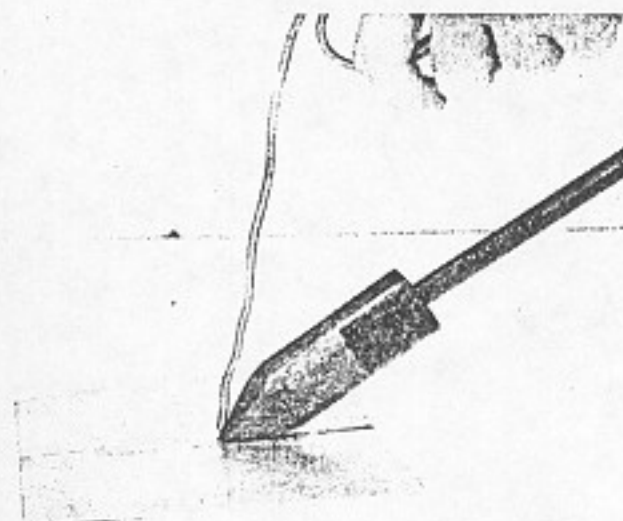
For ease of soldering, the soldering copper should always be well shaped and tinned.
